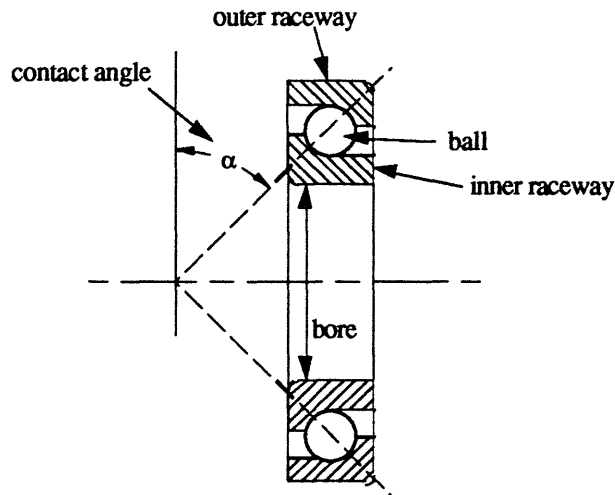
Angular Contact Ball Bearing Nomenclature.
